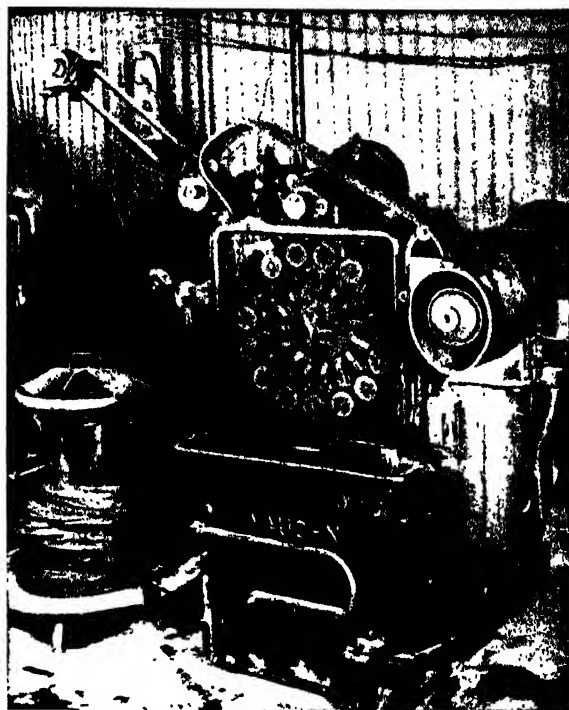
General view of a circular-tandem type of fine-wire drawing machine. (Courtesy of Vaughn Machinery Co.)
